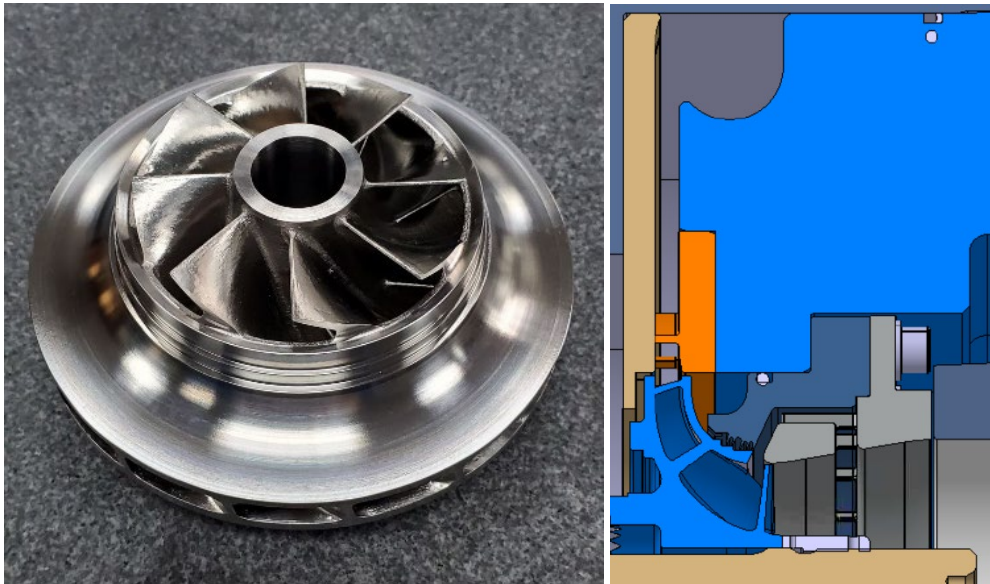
Compressor Impeller (left) and Compressor Test Geometry (right)
